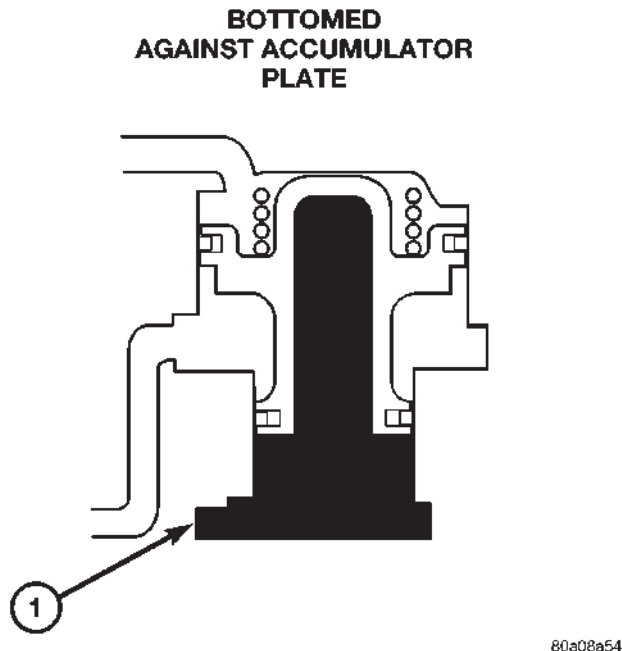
Accumulator in DRIVE - FIRST GEAR POSITION
